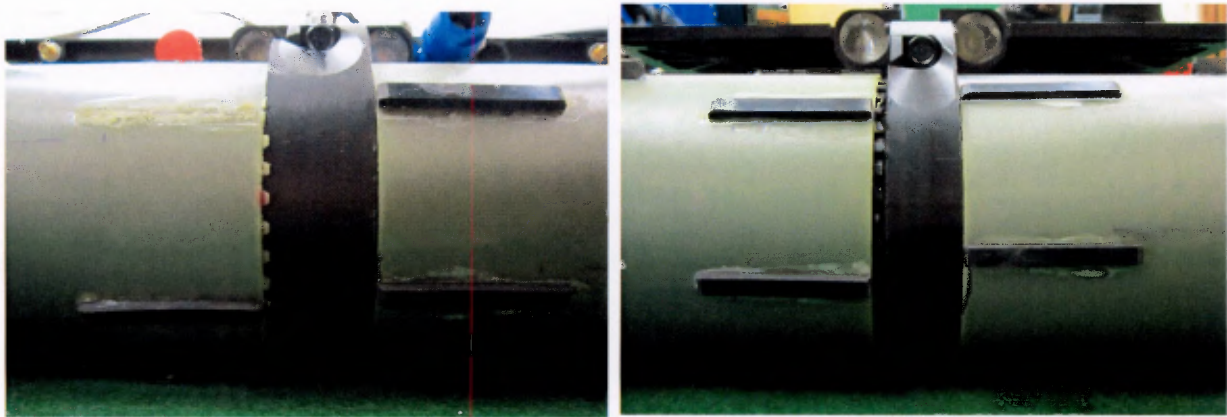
A brass journal bearing added to the pulley assembly.
